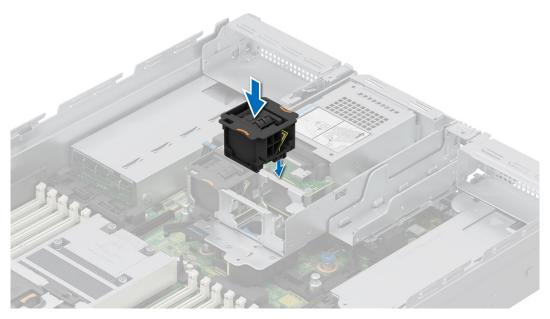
Installing a 2 x 2.5-inch rear drive module cooling fan
